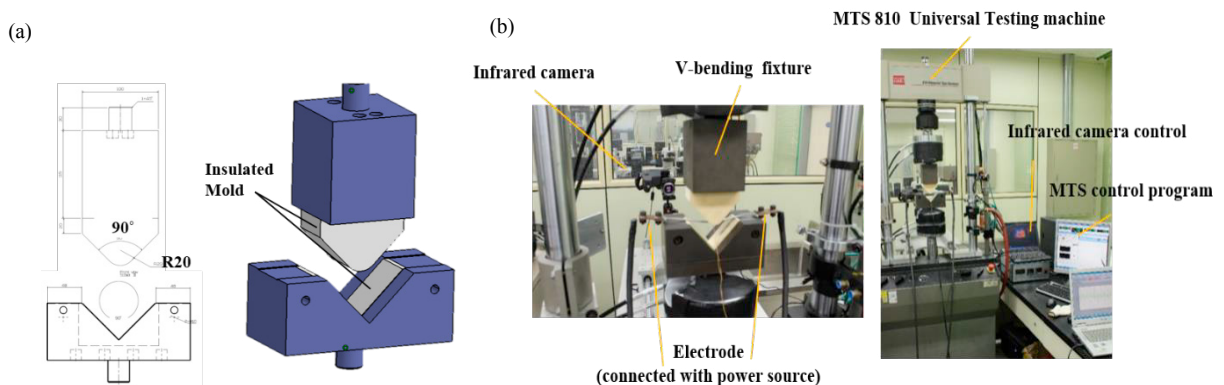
Electrically assisted V-bending tests: (a) test fixture; (b) experimental set-up
